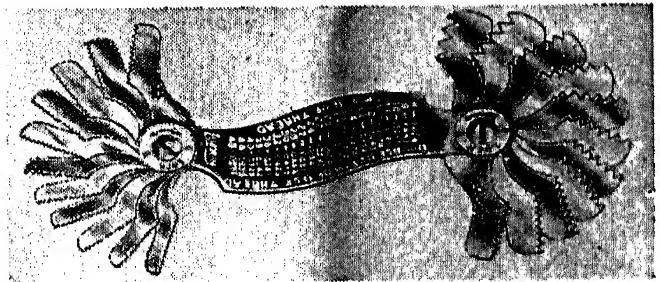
A set of screw thread pitch gages. (Courtesy The Lufkin Rule Co.)
